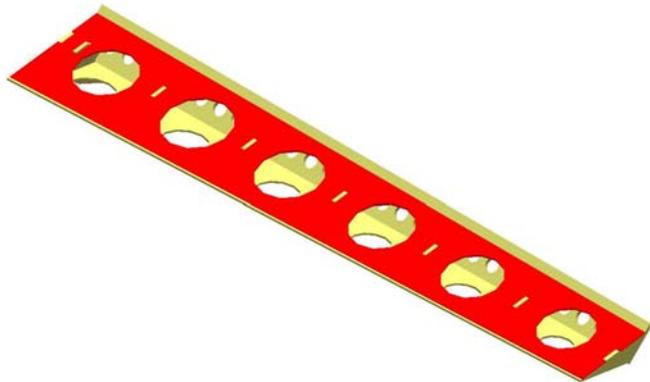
(No Glue) Install top aileron sheet. Place a piece of $\frac{3}{4}$ " Scotch tape the full length of the aileron on the bottom sheet at the trailing edge. The tape should hang halfway over the edge. Flip the aileron over with the sticky side of the tape up and the control horn hanging over the edge of the table. Use a straight edge tool to pinch the top and bottom sheets together at the trailing edge. Do not apply excessive pressure. The tool should be $\frac{1}{4}$ " from the trailing edge. Glue the trailing edge with thin CA. The tape will keep the part from sticking to the work surface. Glue all joints at this time. Glue ribs through holes in top and bottom sheets. Saturate the control horns with thin CA glue.
